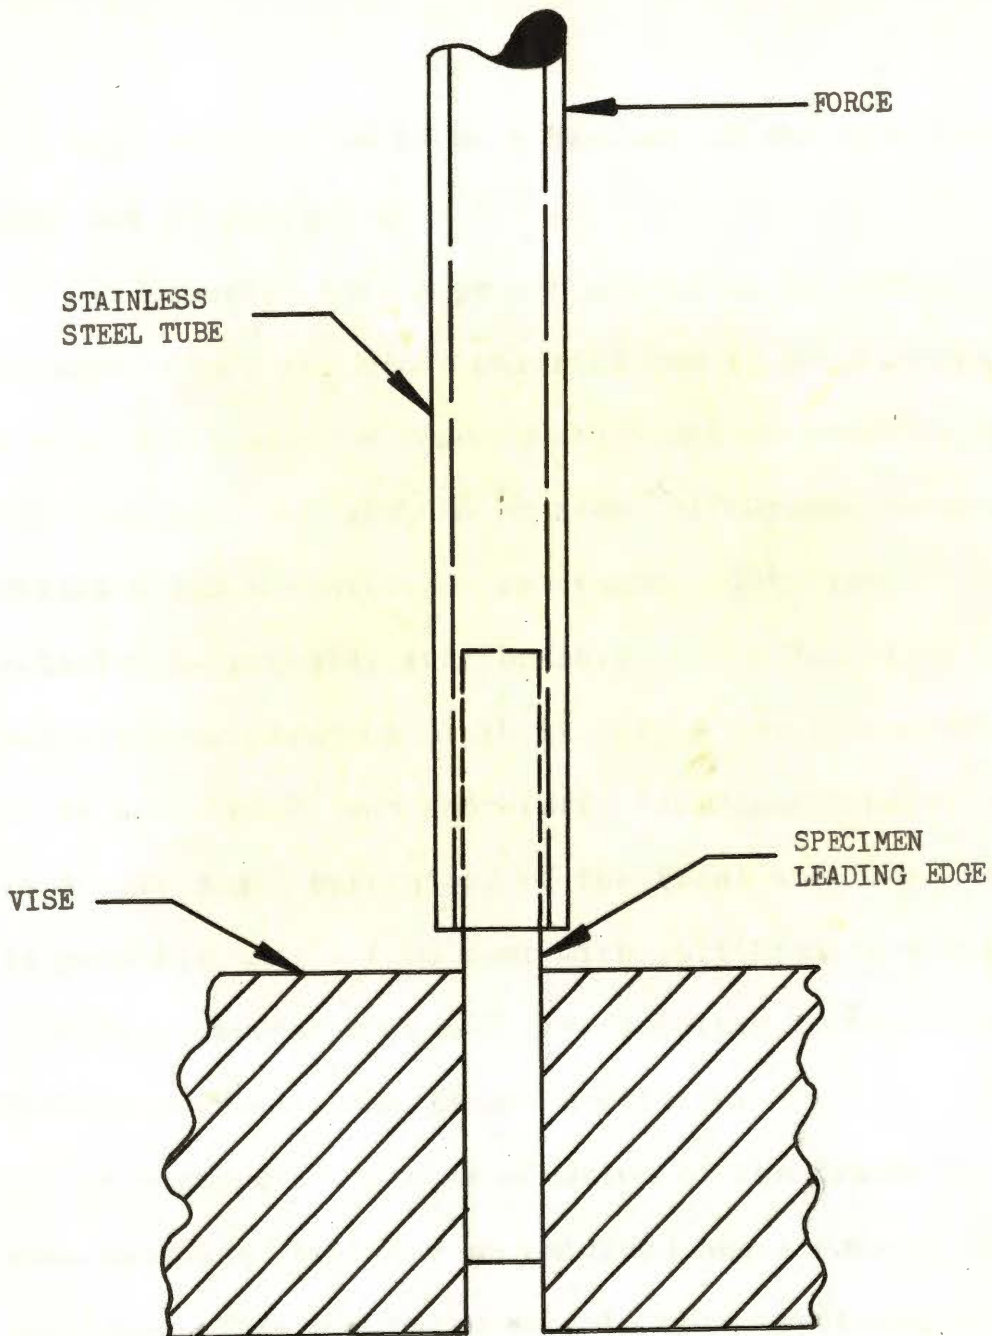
SKETCH OF TEST SET-UP USED TO BEND TURBINE BLADE LEADING EDGE SPECIMENS FOR DUCTILITY INVESTIGATION.
